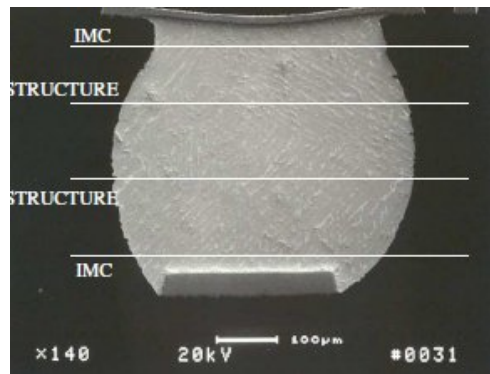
Mixed Assembly Solder Joint Crack after 2000 Cycles
